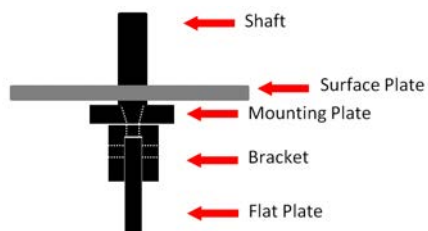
Details of the airfoil and wing modified mounting bracket.
